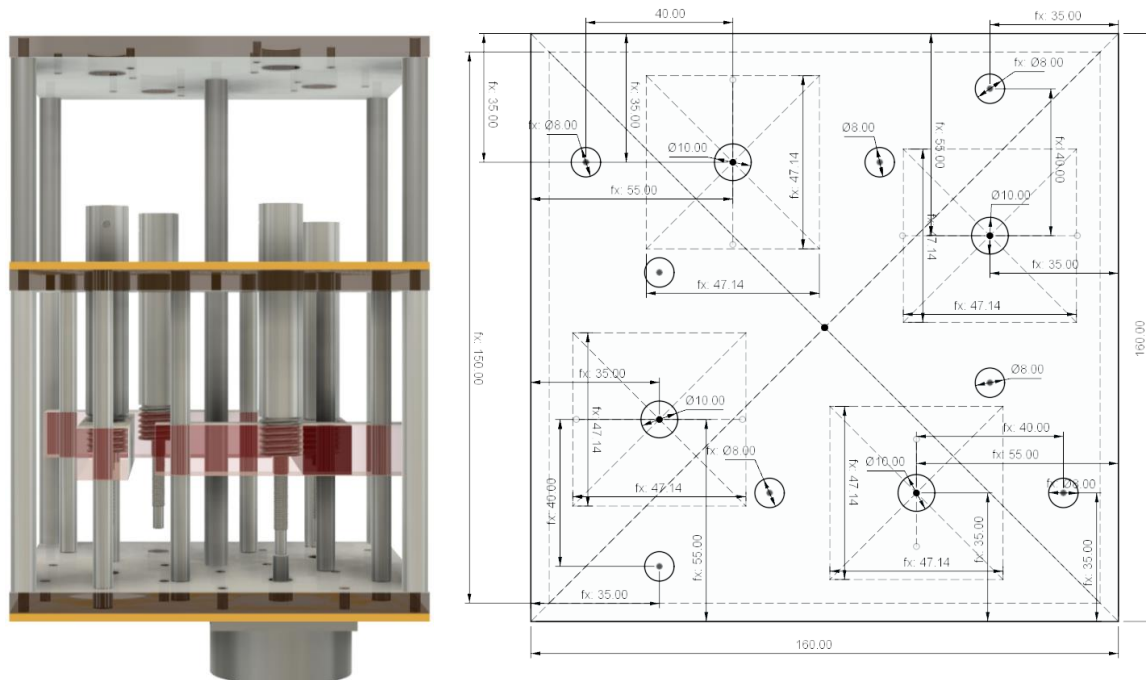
3D CAD representations of the 4-position stepper motor assembly (Left) and technical drawing of the layout of the bottom layer of the assembly (Right).
